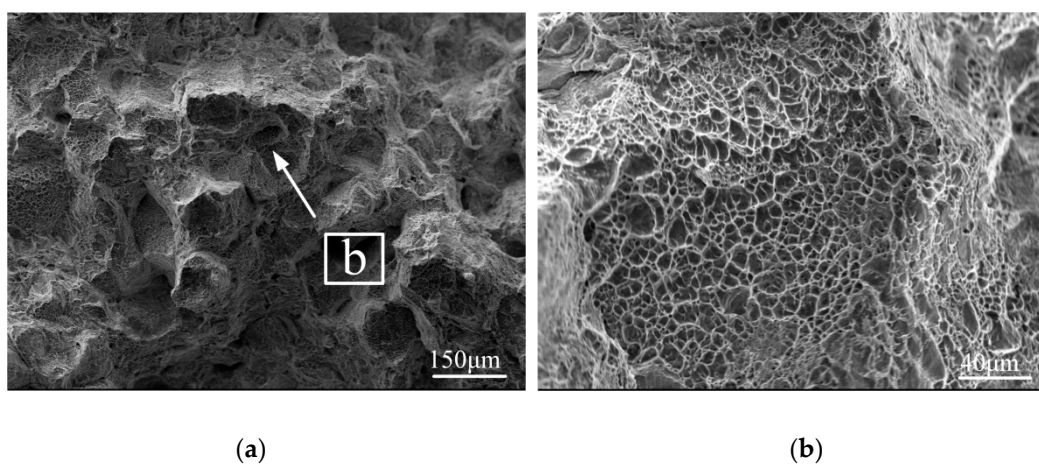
The fracture of the welded joint with preheating at 150 °C in tensile test: (a) The overall morphology; (b) the enlargement of b.
